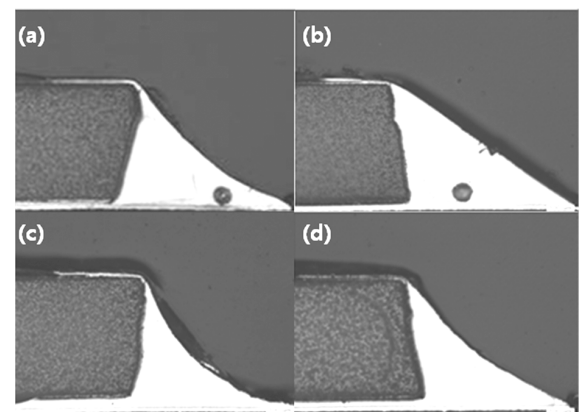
Cross-section of the chip soldered joints before vibration: (a) SAC105, (b) SAC305, (c) SACX0307 and (d) SACX1207
